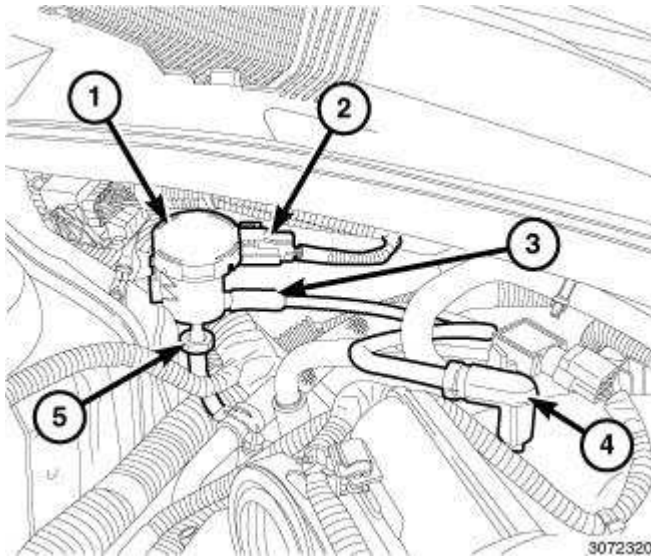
EVAP Purge Solenoid, Electrical Connector & Vacuum Lines
